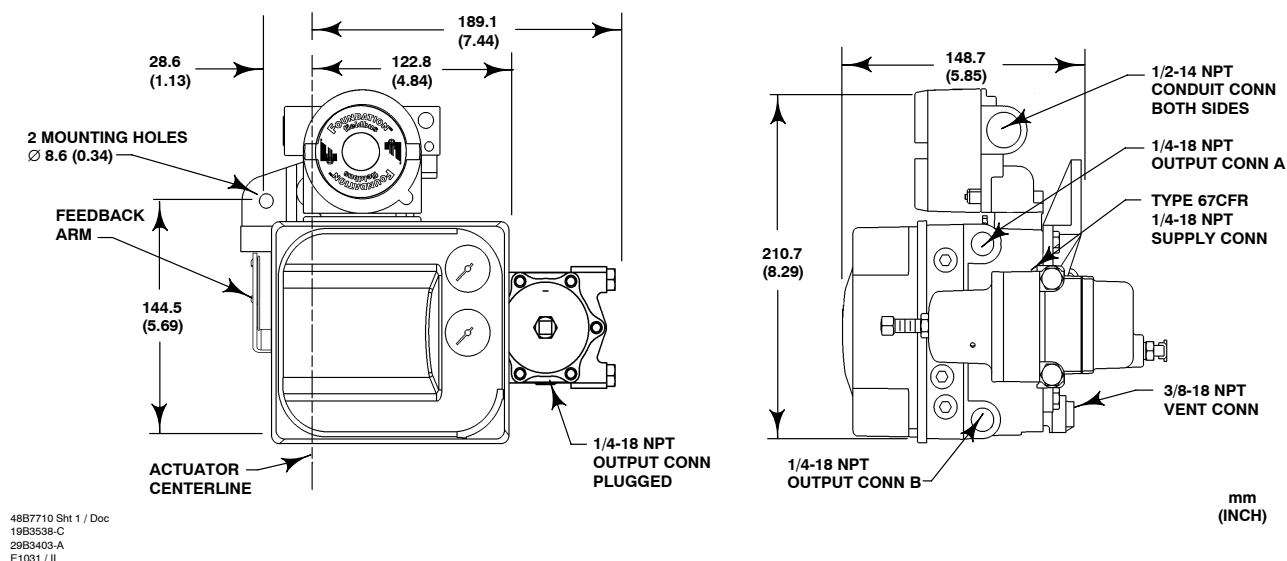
Dimensions for Type DVC6010f Digital Valve Controller with Integrally Mounted Filter Regulator
